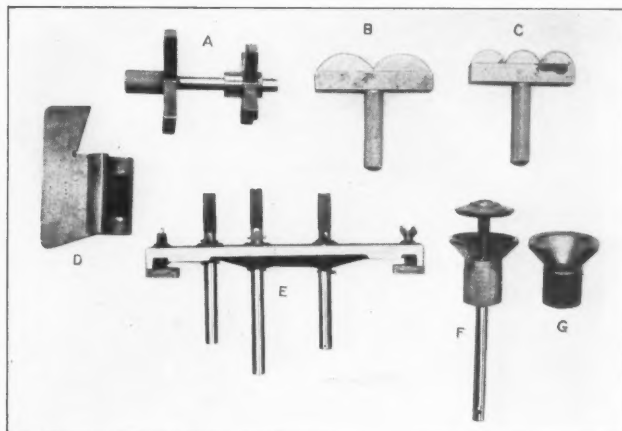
Some of the Gages used in the Inspecting Department for Testing the Accuracy of Keyseats, Valves, Bevel Gears, etc.
